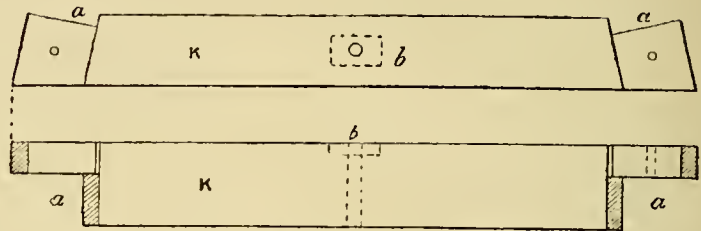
CROSS-PIECES FOR GRANKSHAFT GENTRES.
